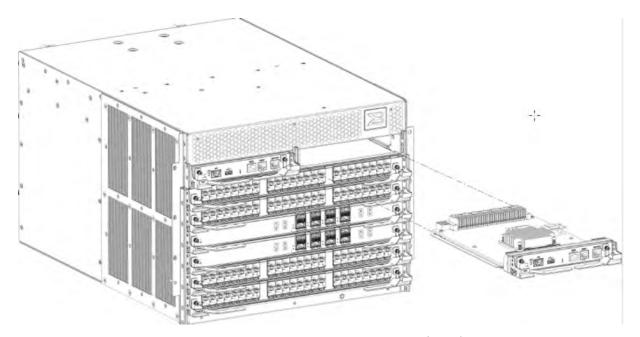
Removal and Replacement of the Control Processor Blade (CPX7) on an SAN256B-7 Director 10. If the blade is not being replaced by another blade, install a filler panel and reinstall the chassis door. The filler panel is required for proper chassis cooling. The door is required to meet EMI compliance.
